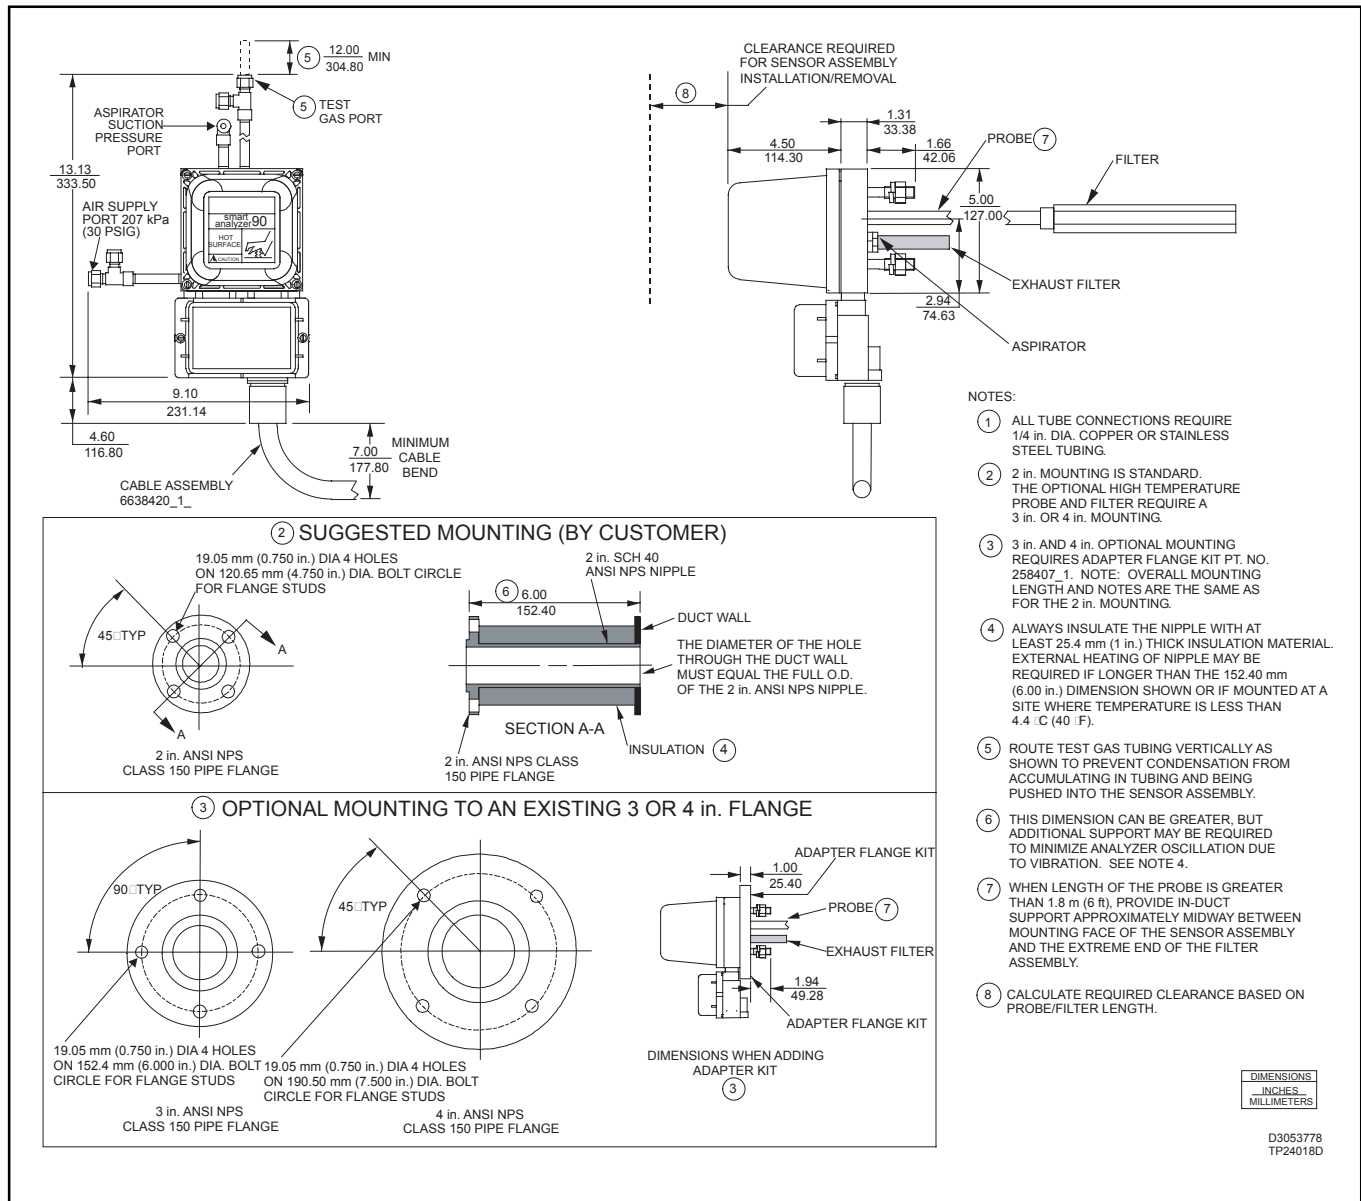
Outline and Clearance Requirements (Sensor Assembly)
